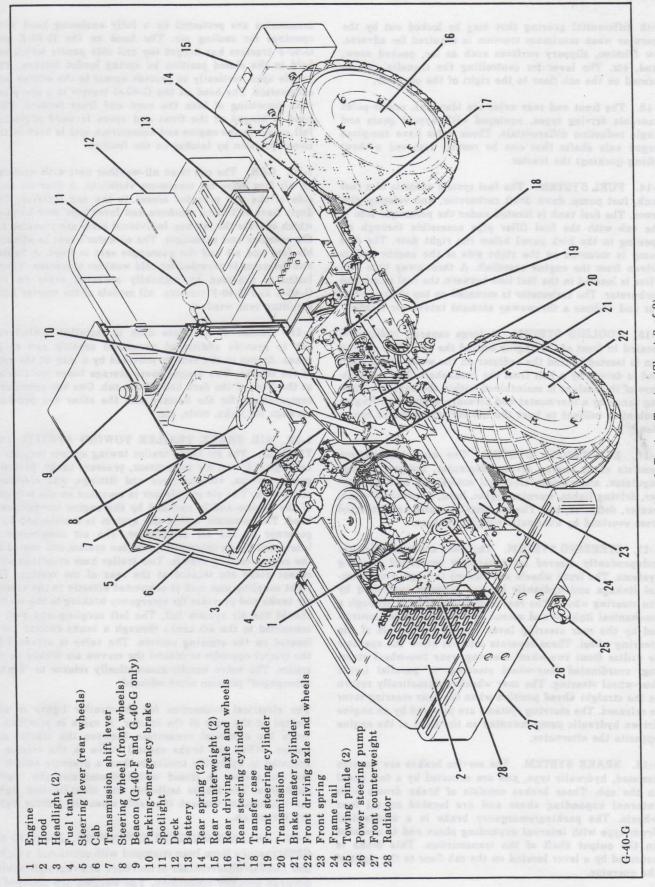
Aircraft Towing Tractor (Sheet 2 of 2)
